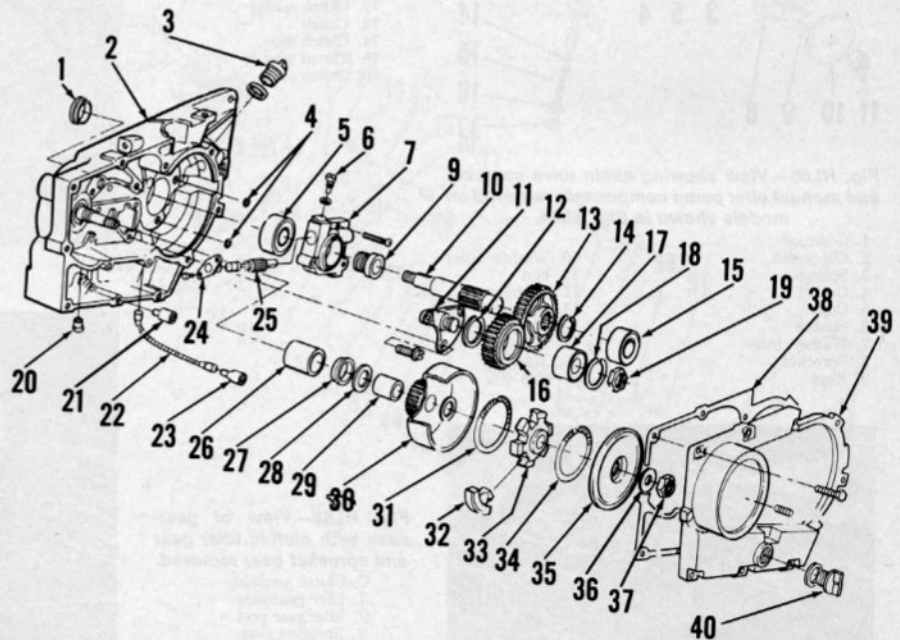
Exploded view of gear drive assembly used on Models S1130G and 3100G. Refer to Fig. HL65 for view of opposite side of gearcase and chain drive sprocket. Ratios of 2:1 and 3:1 can be obtained by changing gear (13) and repositioning idler gear assembly to accommodate the different gear diameter. The 2:1 ratio gear has 42 teeth and the 3:1 ratio gear has 64 teeth.
